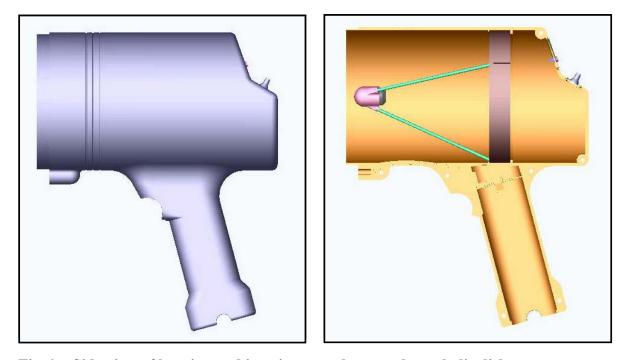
Side view of housing and interior transducer and parabolic dish components.
